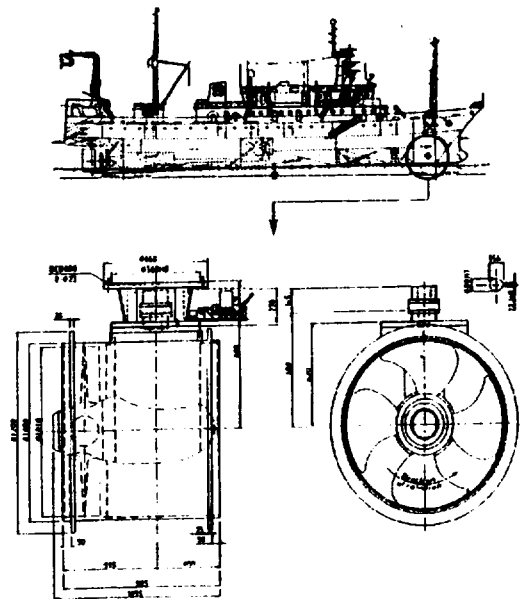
Side view of the experimental ship M.S A-RA and bow thruster
